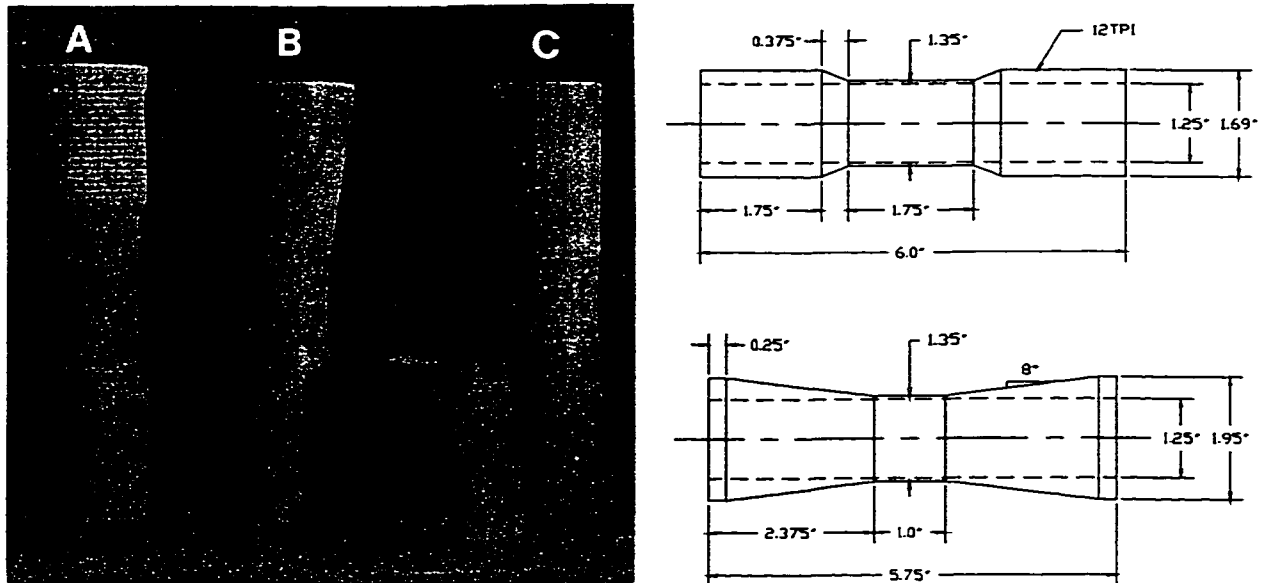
Specimens with integrated connections; (left) (a) threaded end connections, (b) conical wedge end connections, (c) failure at conical wedge, (right) specimen dimensions.
